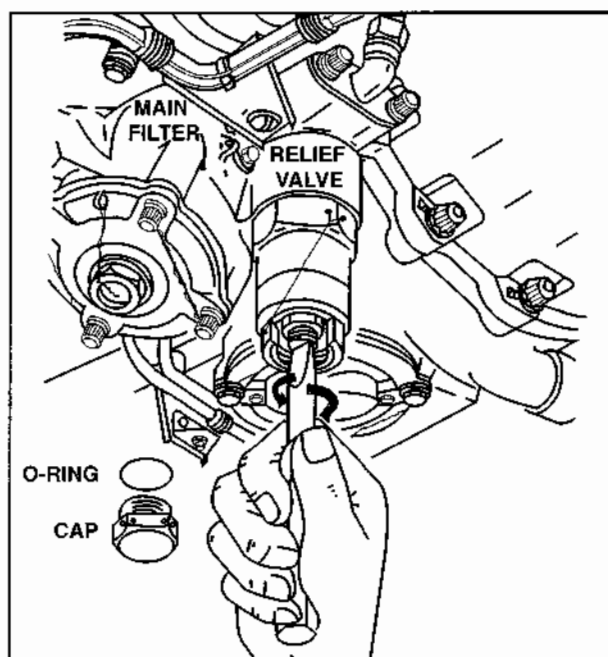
An oil pressure relief valve occasionally requires adjustment. With the engine operating at idle speed, turn the adjusting screw clockwise to increase oil pressure and counterclockwise to decrease oil pressure.
